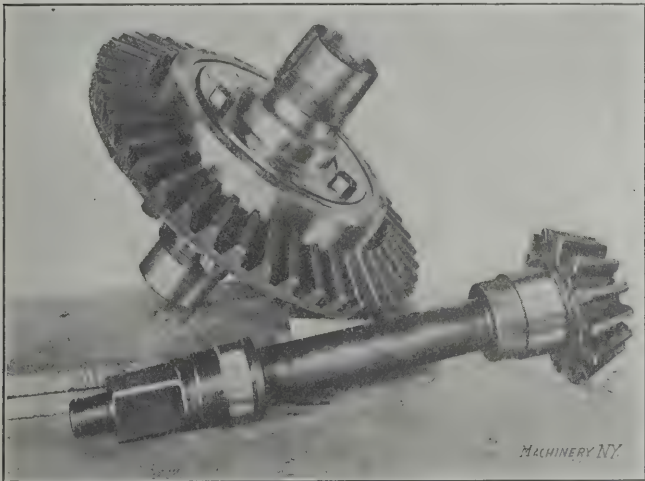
The Equalizing Gear Complete, with Bevel Gear and Pinion, as used in the Stevens-Duryea Automobile
